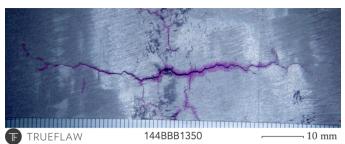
PENETRANT IMAGES OF PRODUCED CRACKS (30 mm TARGET DEPTH).
